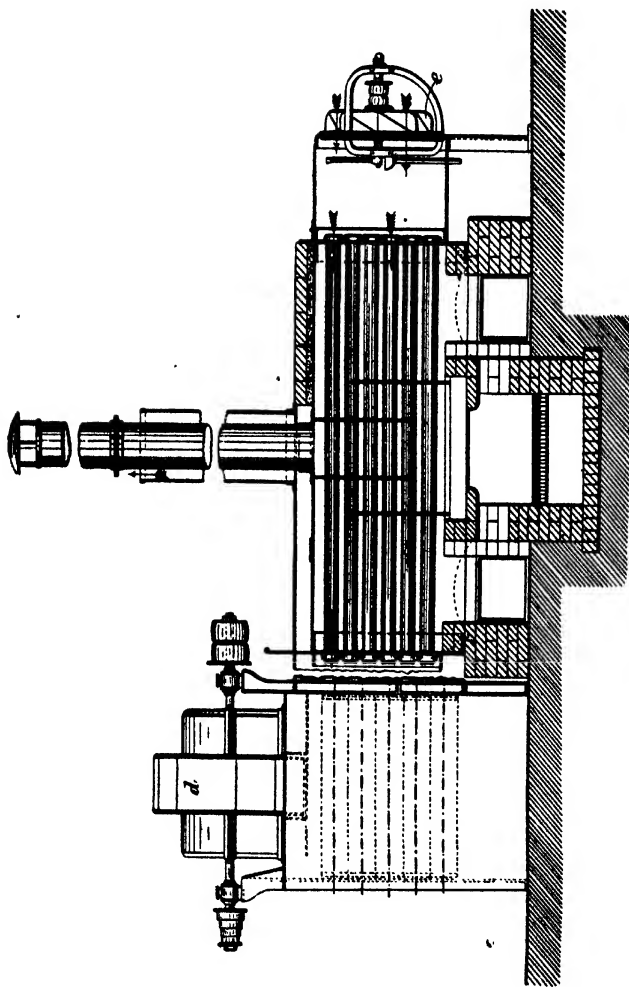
Automatic Up-draught Tea Drying Machine, with Reversible Oppositely Moving Trays Mounted on Separate Chain Wheels (transverse section).
